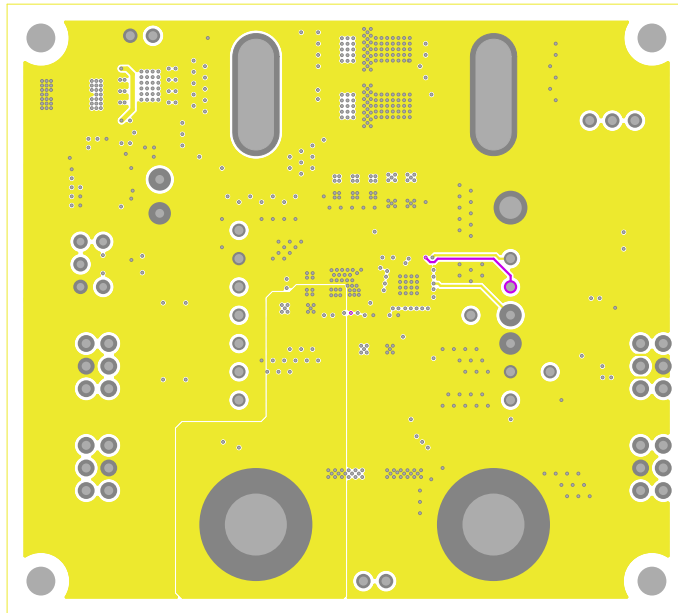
PCB - Inner Layer - Layer 4 (Top View)
